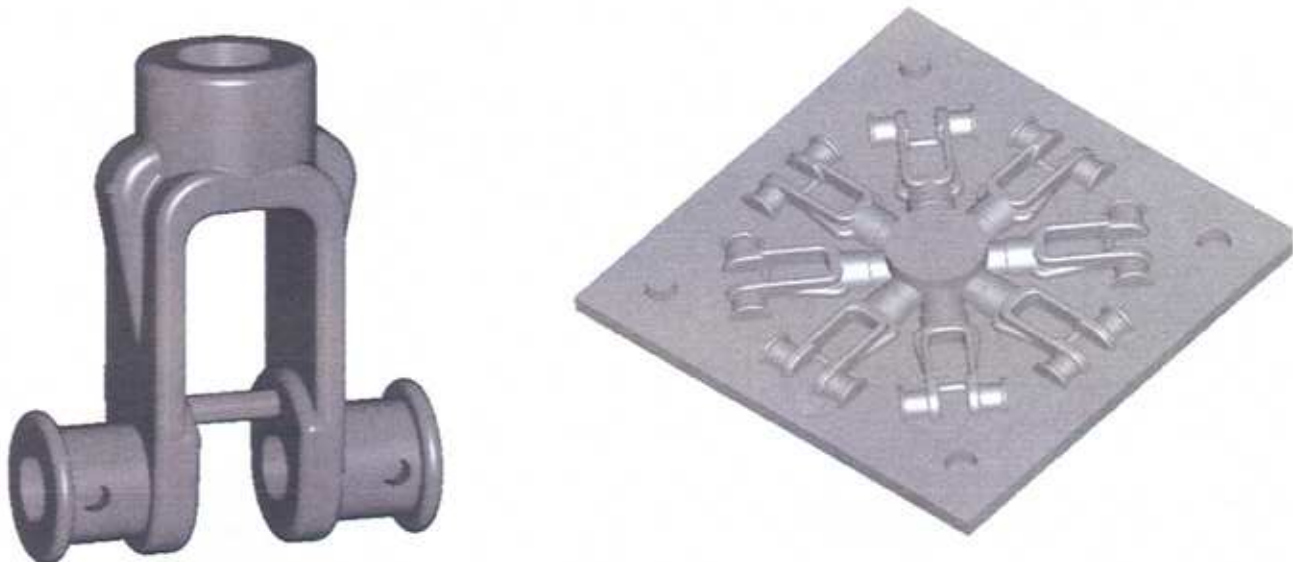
Wall chaser main body and CAD tool layout
